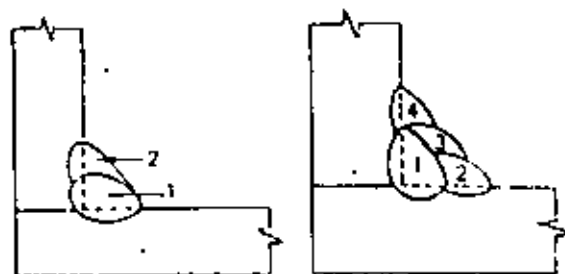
Technique for multi-pass horizontal fillet welds with fast fill electrodes. Beads should be deposited in the order indicated.
